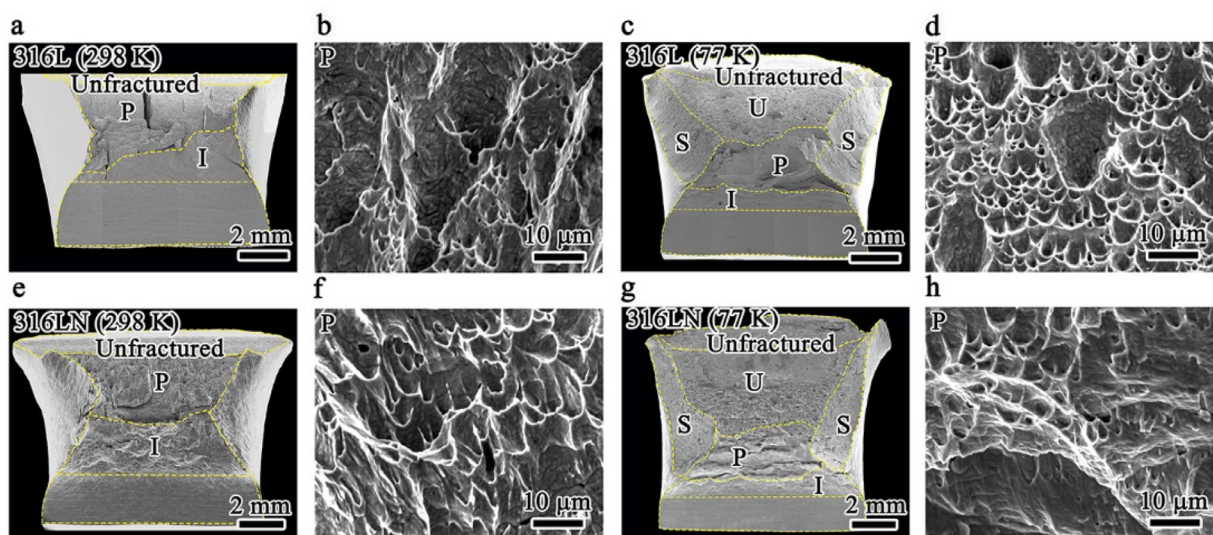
Fractography after impact testing in 316L and 316LN. (a) Fracture surface of 316L at 298 K. Only initiation (I) and stable crack propagation (P) area are visible. (b) Close-up image in P area. (c) Fracture surface of 316L at 77 K. Besides I and P, large unstable crack propagation (U) and shear-lip (S) areas are also visible at 77 K. (d) Close-up image in P area. (e) and (f) Fracture surface and close-up image in P area in 316LN at 298 K, respectively. (g) and (h) Fracture surface and close-up image in P area in 316LN at 77 K, respectively.
